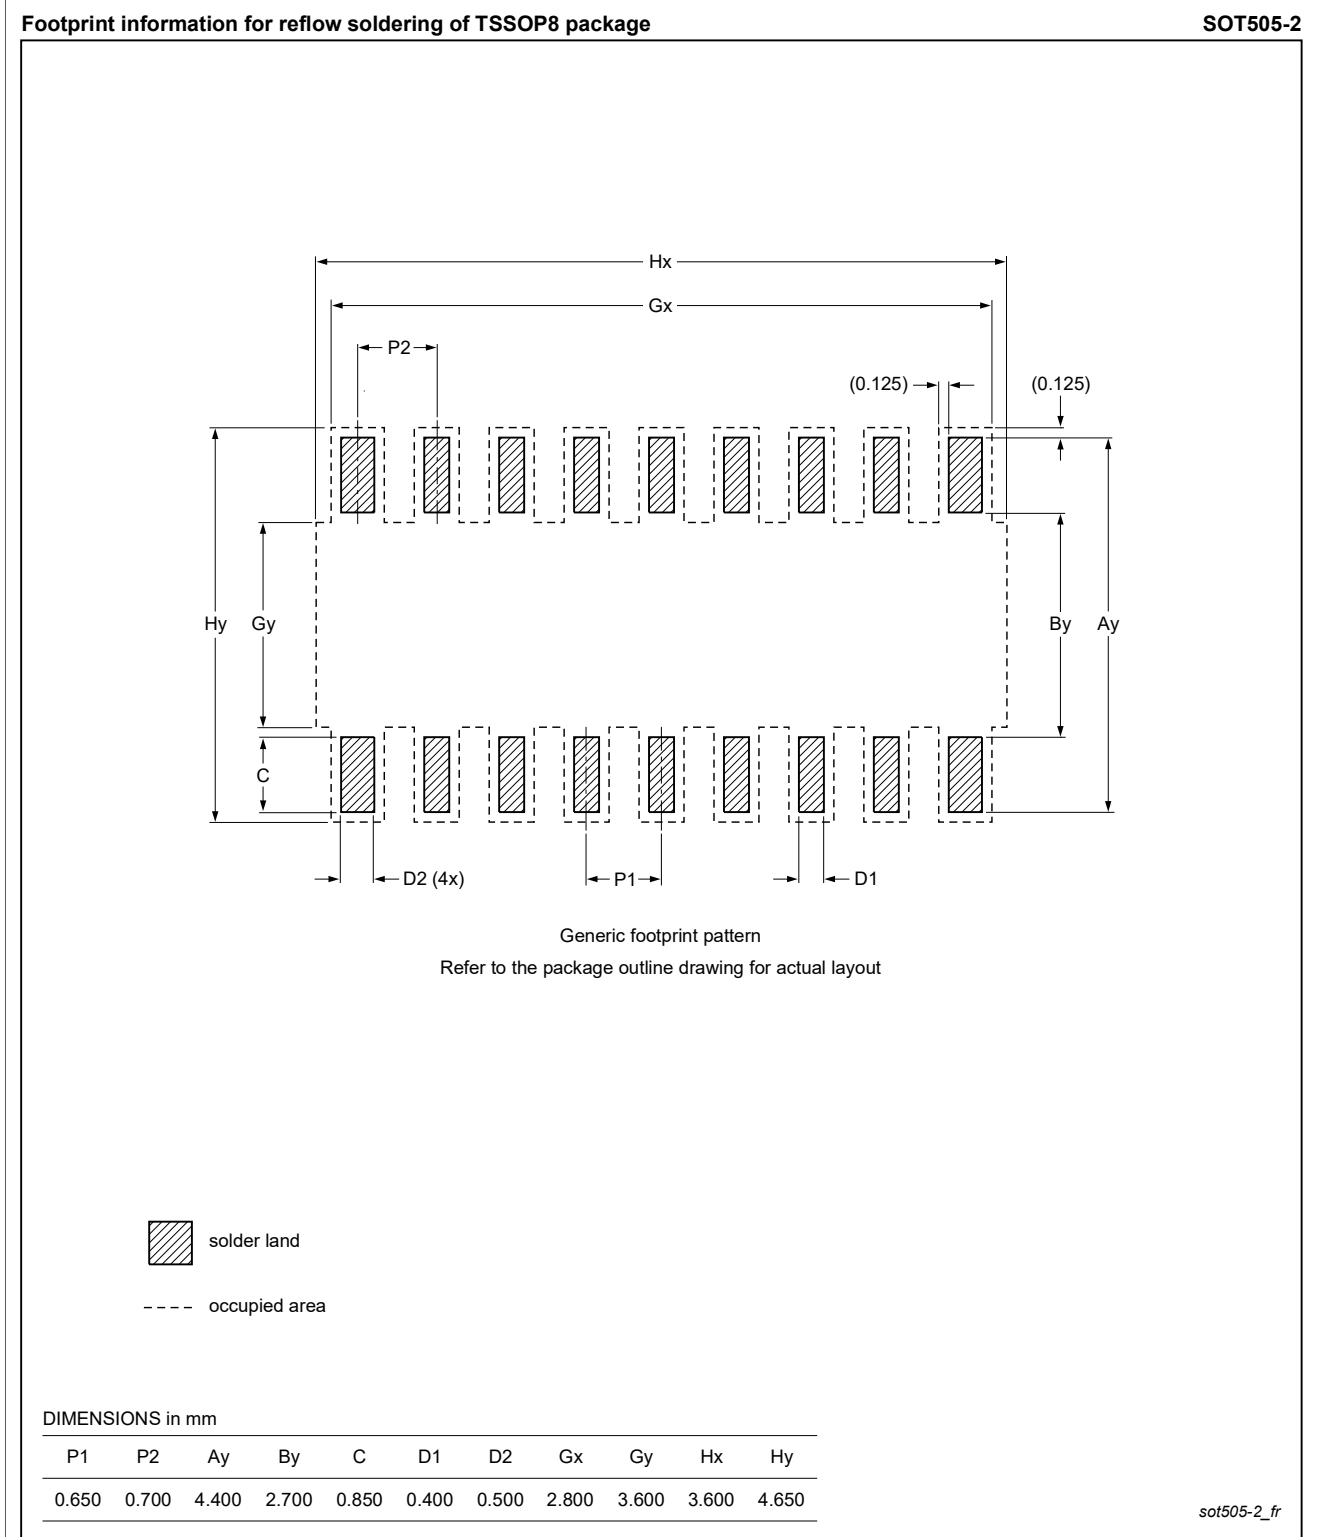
PCB footprint for SOT505-2 (TSSOP8); reflow soldering
